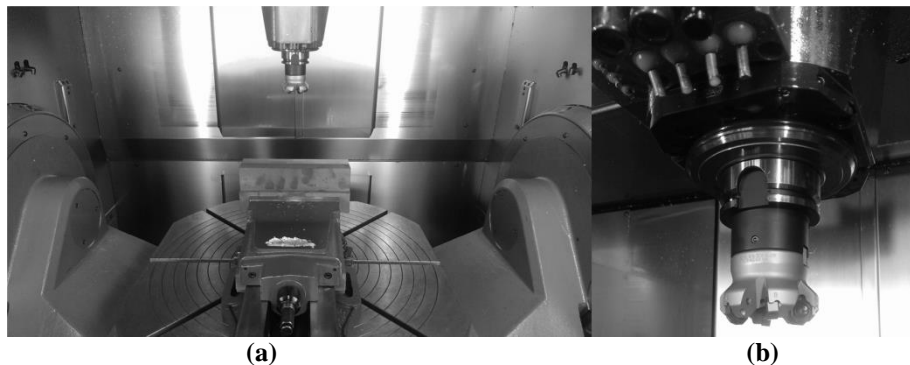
(a) Machining setup of workpiece and cutting tool for experimentation, (b) cutting tool setup for machining experiments
